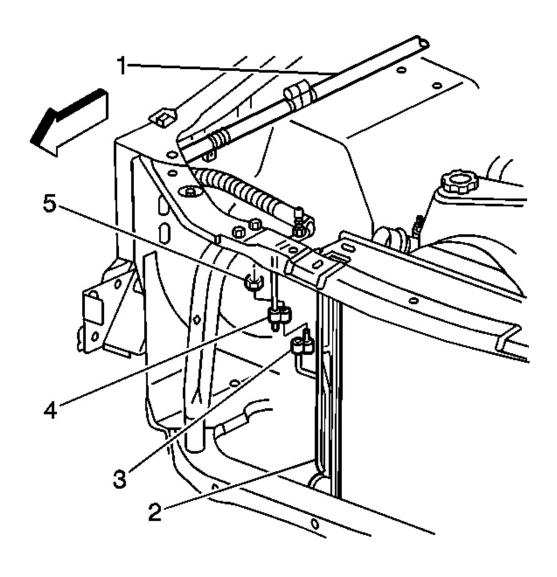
Removing/Installing Condenser Courtesy of GENERAL MOTORS CORP.
